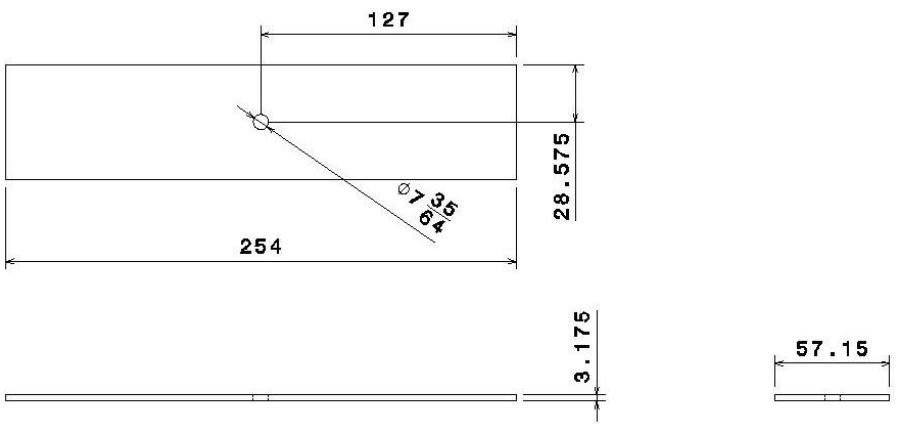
Engineering drawings of experimental specimen dimensions that were provided to the ERAU Manufacturing Shop.
